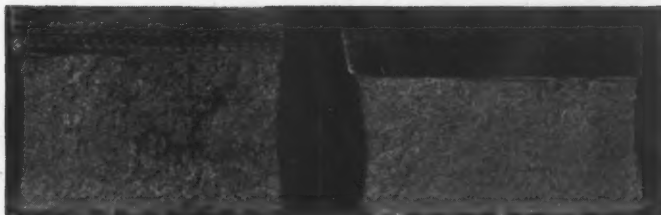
An enlargement of the half cross section of the poorly fed casting (Fig. 1) showing considerable porosity. Strongly etched with ammonium persulphate. About 25X.
